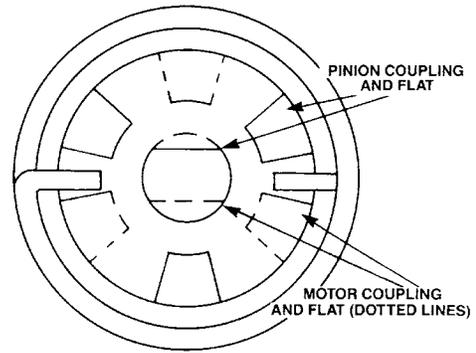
B. Brake Spring, Motor and Pinion Coupling Alignment
